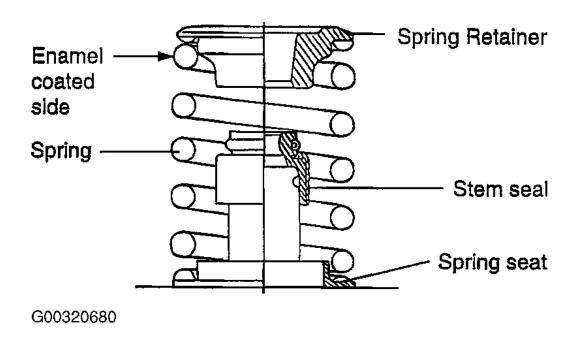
Positioning Valve Spring Courtesy of KIA MOTORS AMERICA, INC.
